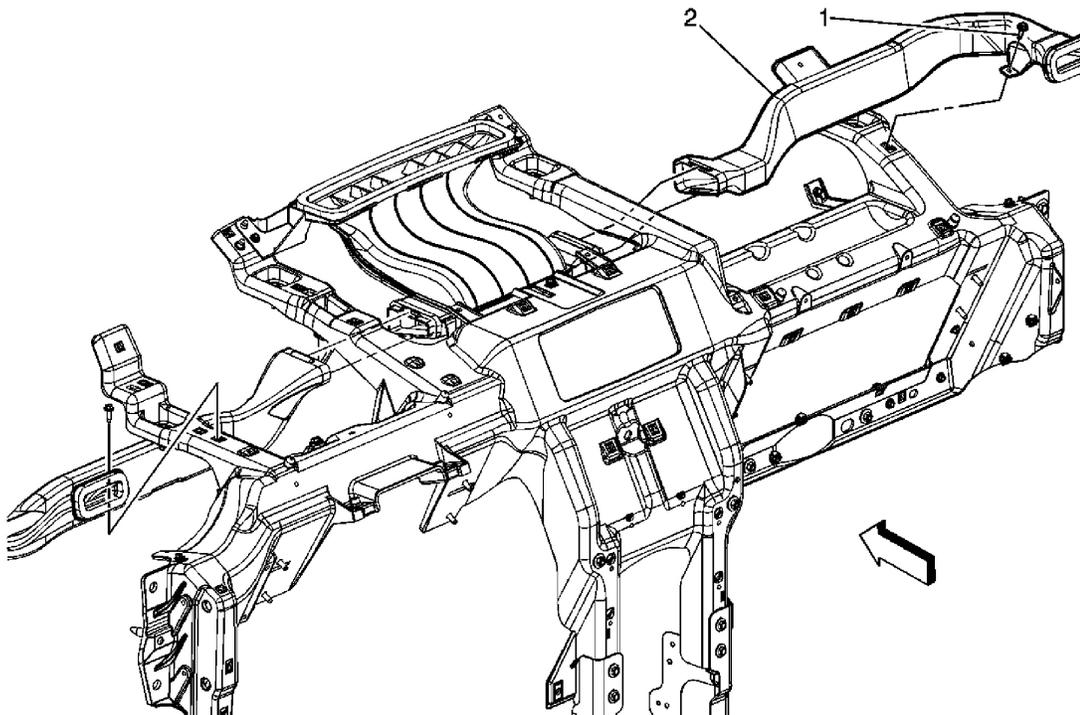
Identifying Side Window Defogger Outlet Duct - Right Side
